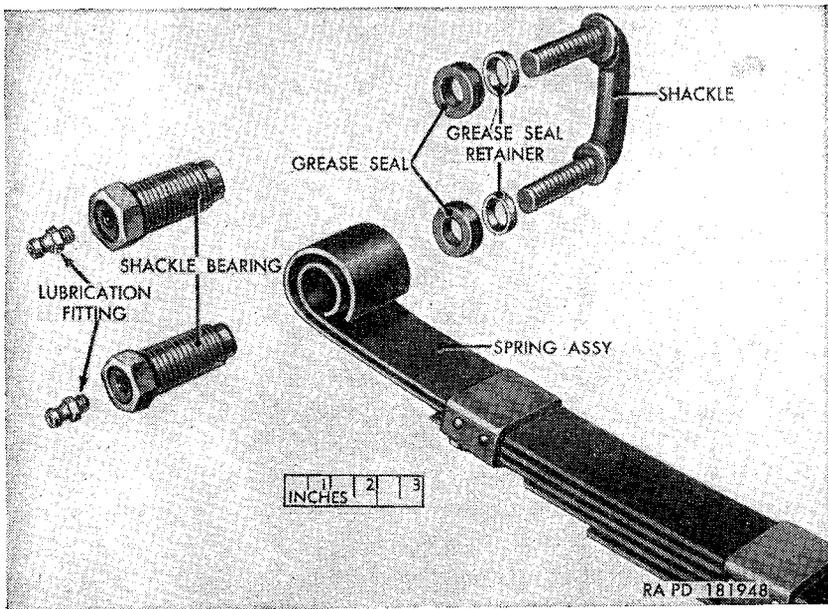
Spring shackle and spring shackle end of spring (M38A1)—exploded view.
